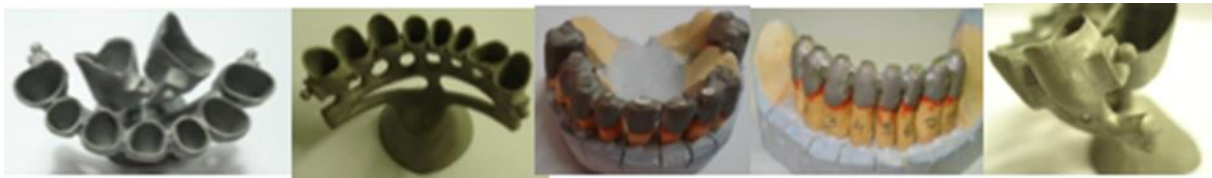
Casted copings for upper and lower arch; framework set on the; detail of the casted attachment.
